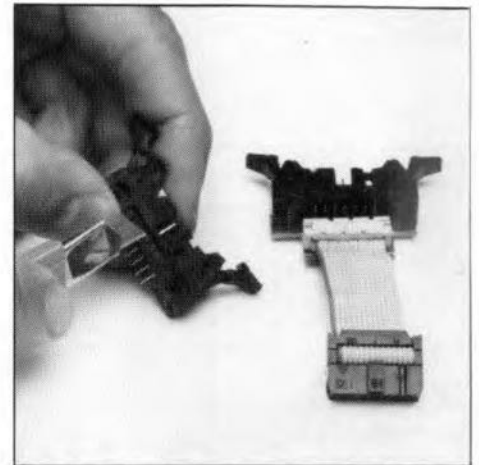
Illustrating how K20 and K21 and the flatcable are combined on the small connector board. Before fitting this board and K1 on to the main board, a small part has to be cut off K1.
